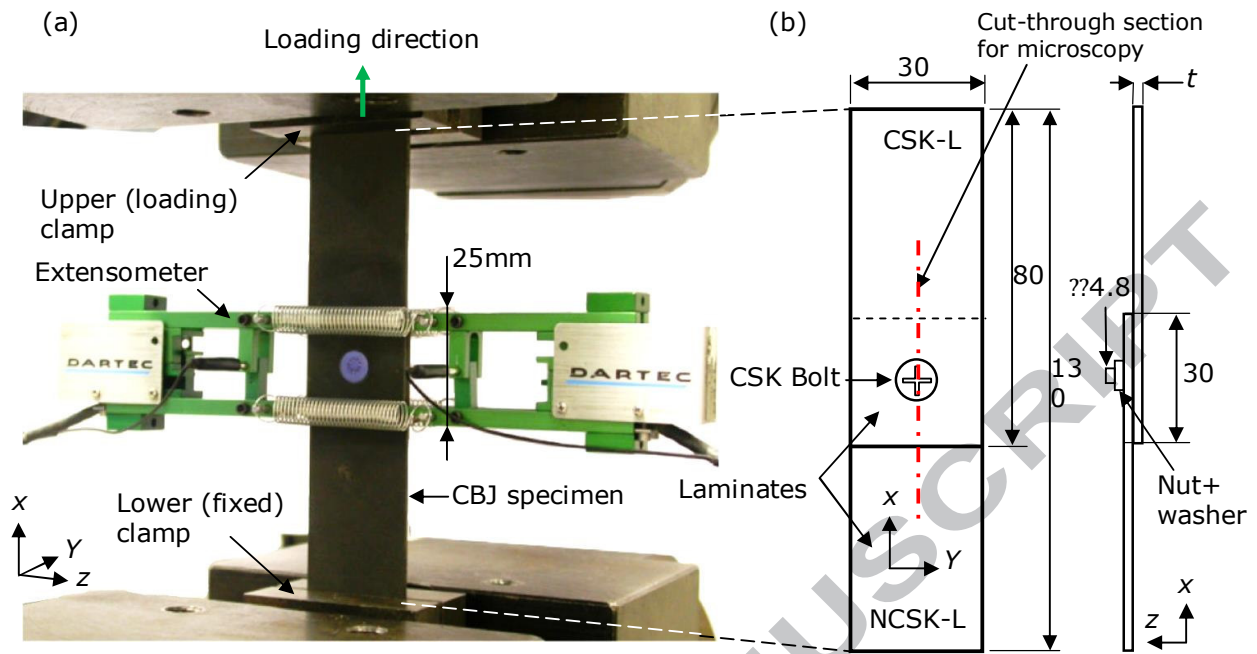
(a) CBJ test setup with extensometer [13], (b) single-lap single-bolt specimen geometry (all dimensions in mm)
